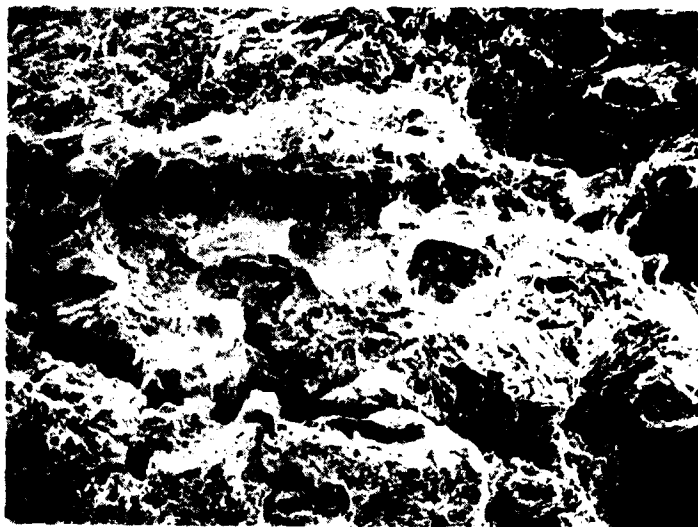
Typical parent and welded HY130 steel fracture faces.
